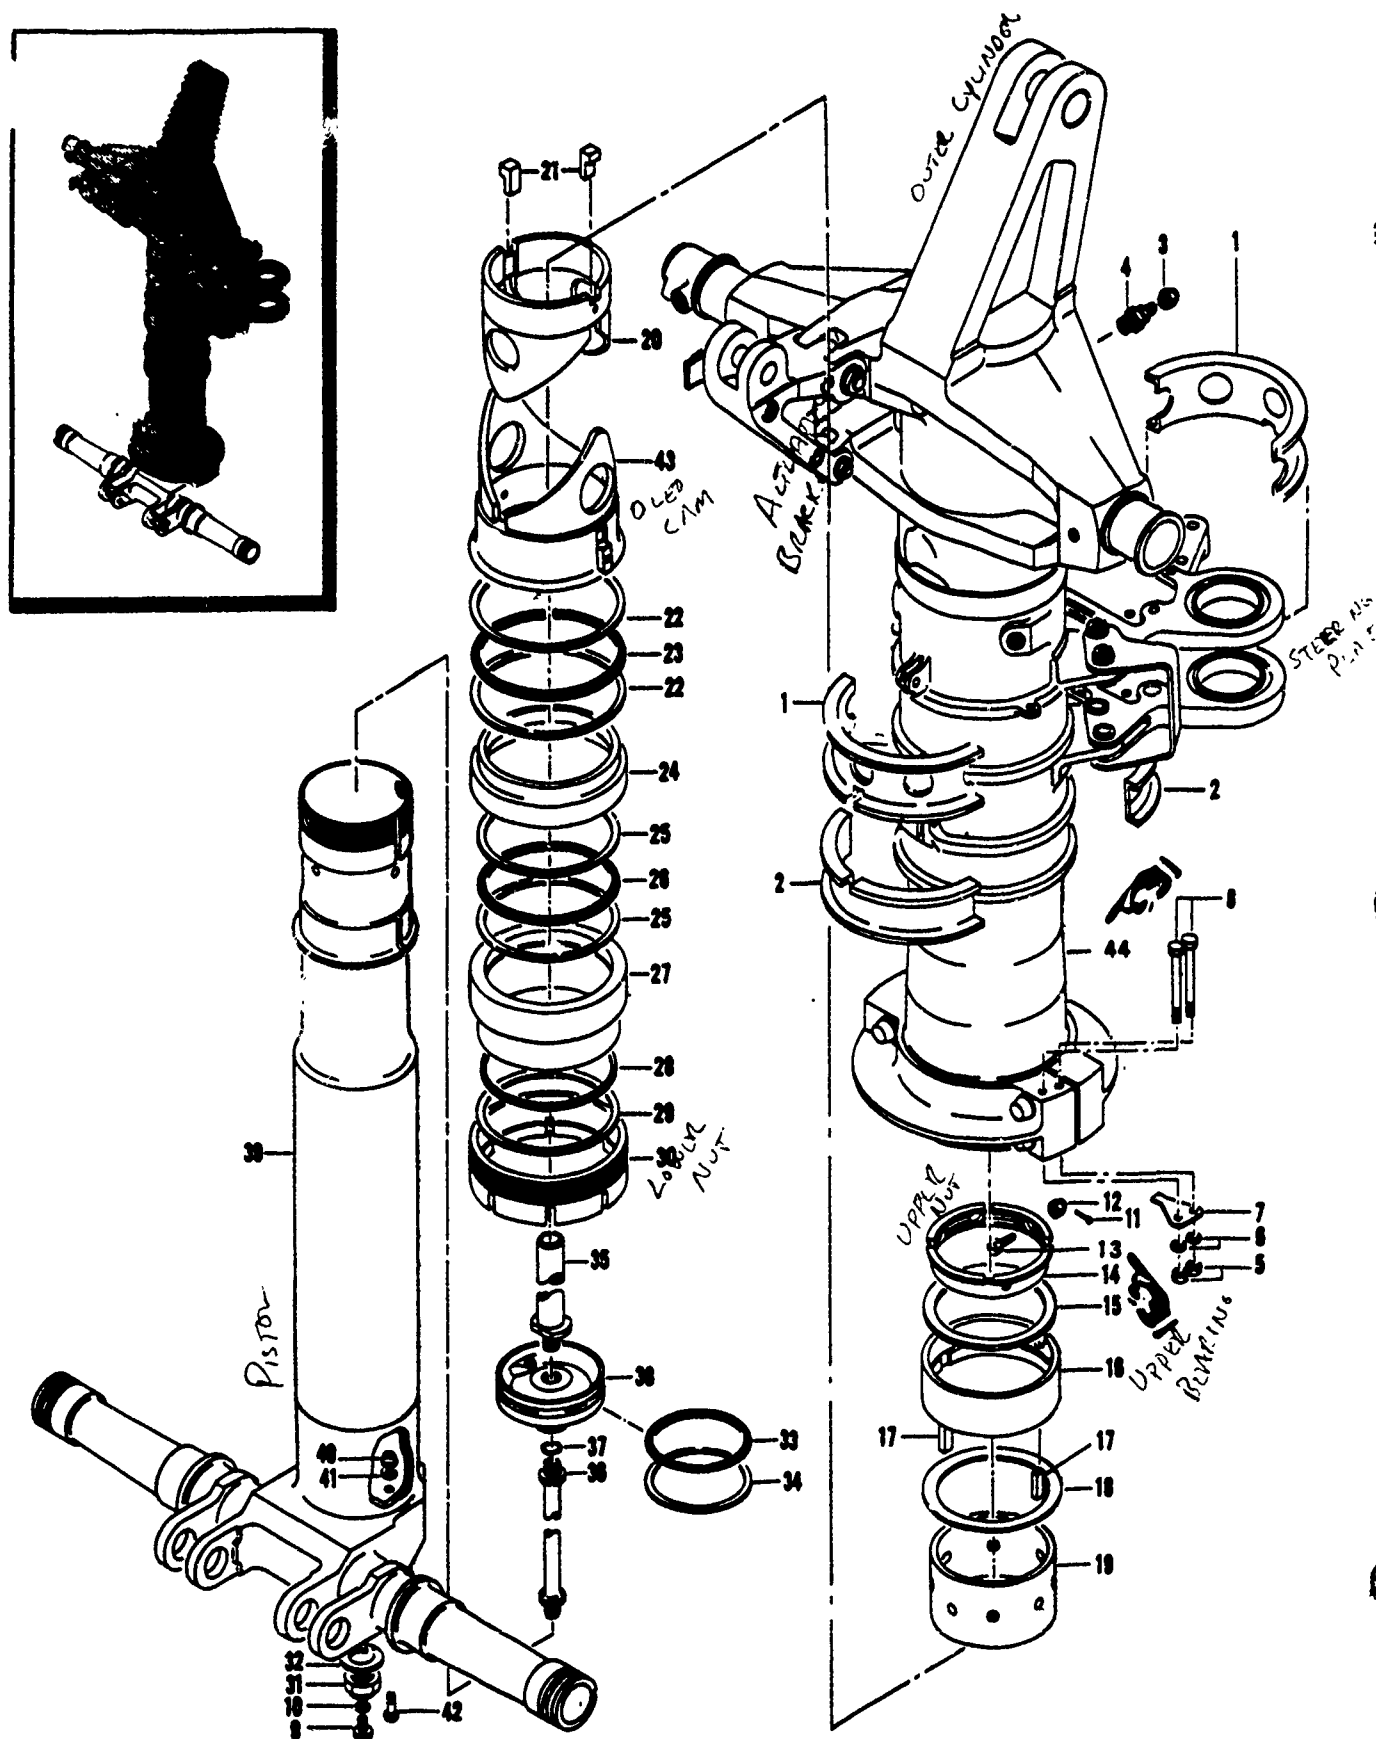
Nose Gear Oleo and Collar Assembly (Sheet 1 of 2)
